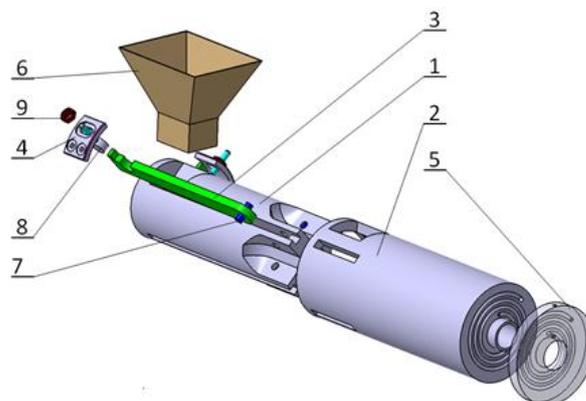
Concept model No 2. Exploded view: 1 – main sleeve, 2 – barrel, 3 – moving segment, 4 – fixing element, 5 – separating cooling disc, 6 – hopper, 7 – fixing pivot, 8 – adjusting screw, 9 – nut
